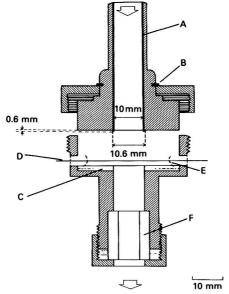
Paper holder. A = Epoxide protective film; B = spring clip; C = PTFE washer; D = test paper; E = paper feed slots; and F = rubber bush.
